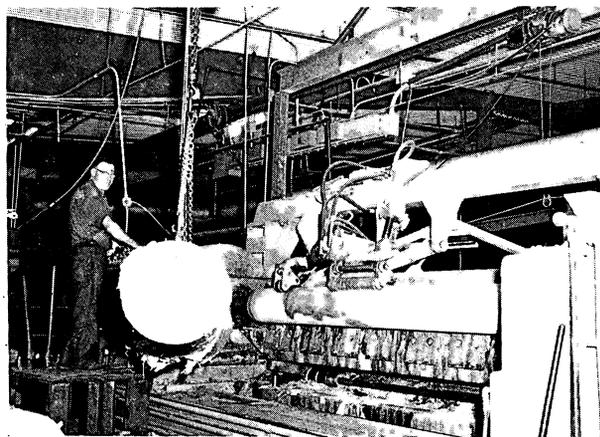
Veneer bolt ready for chucking on rotary lathe.
